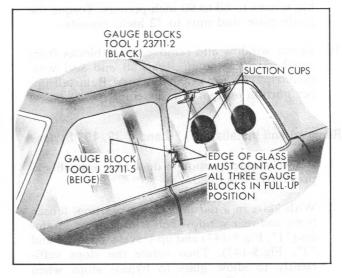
Rear Door Window Alignment - "6CB69" Style
